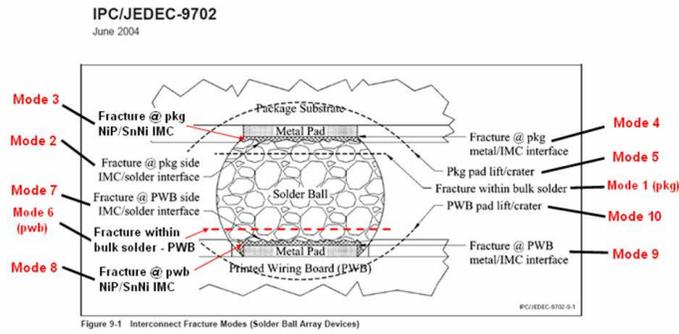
Failure modes in BGA solder joint systems [2]
